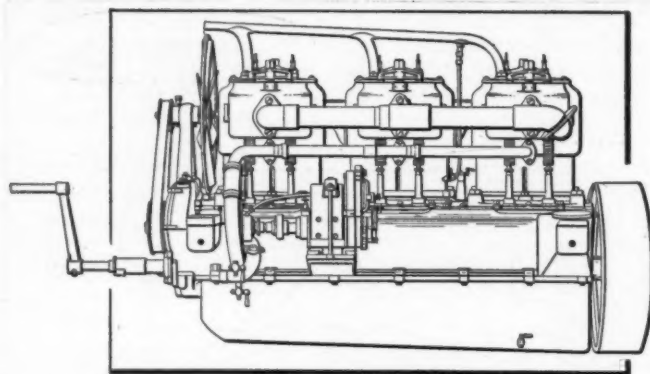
Left-hand side of the 6-60 motor, showing the magneto and water pump driven by a common shaft from a gear in the half-time housing
